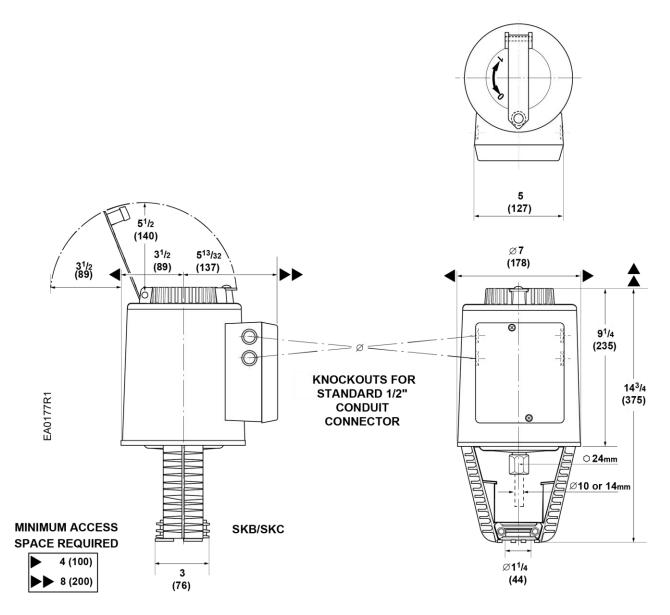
Dimensions of SKB/C in Inches (Millimeters).
